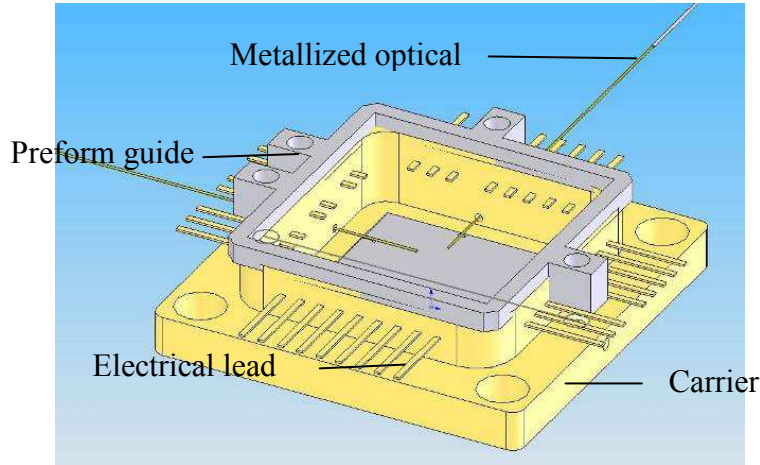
Schematics showing the carrier, metallized optical fibers, electrical leads exiting the carrier side walls, and solder preform guide for smooth solder feeding during fiber-to-carrier attachment.
